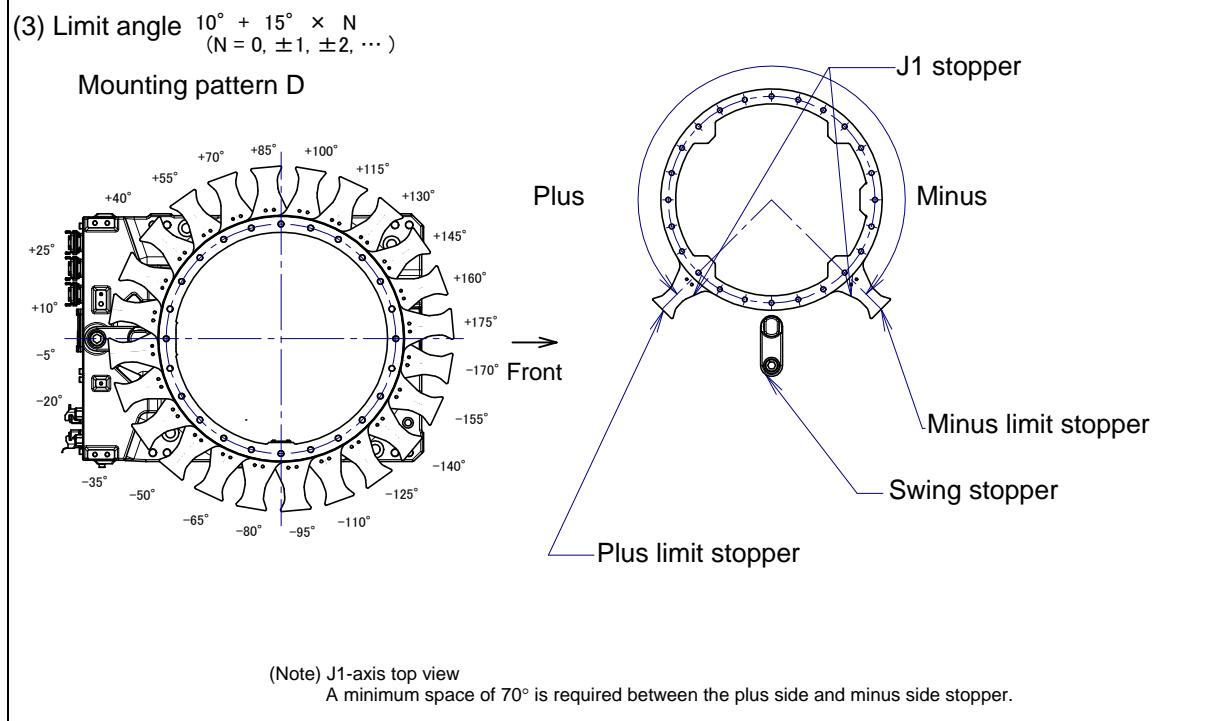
(g) Mounting the J1-axis adjustable mechanical stopper (3/3)
